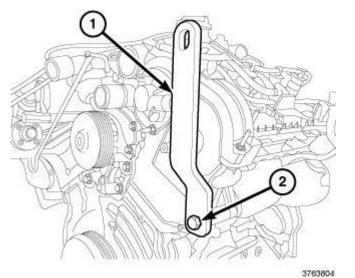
Engine Lifting Bracket & Bolts - Left Front Courtesy of CHRYSLER GROUP, LLC
